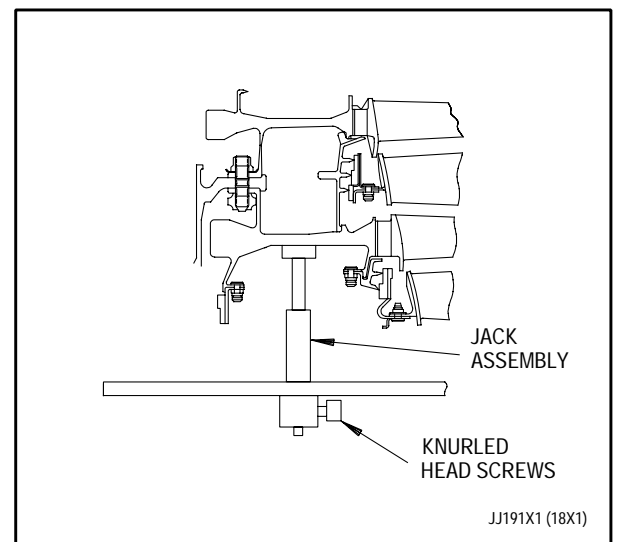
Fan Drive Turbine Module - Installation Into Vertical Build Stand (Sheet 8 of 9)
